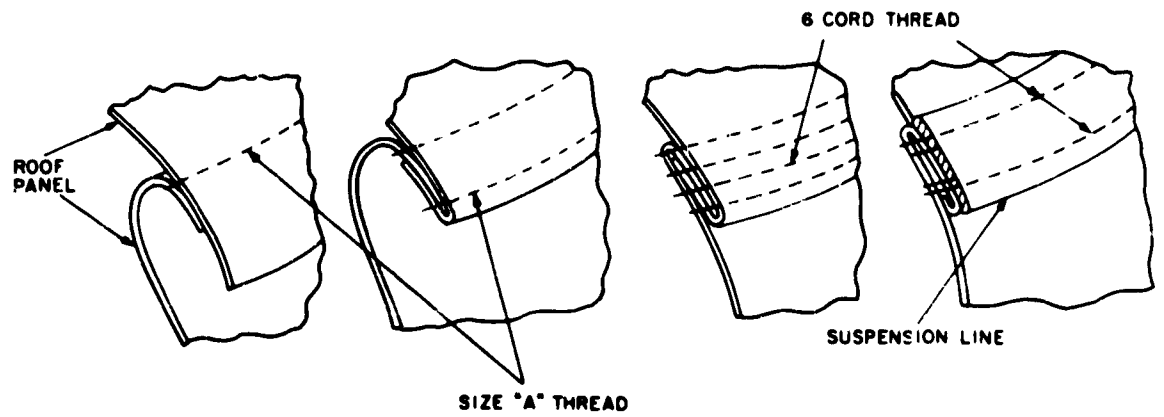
Typical Joint Construction of Roof Panels, Ribless Guide-Surface Canopy
